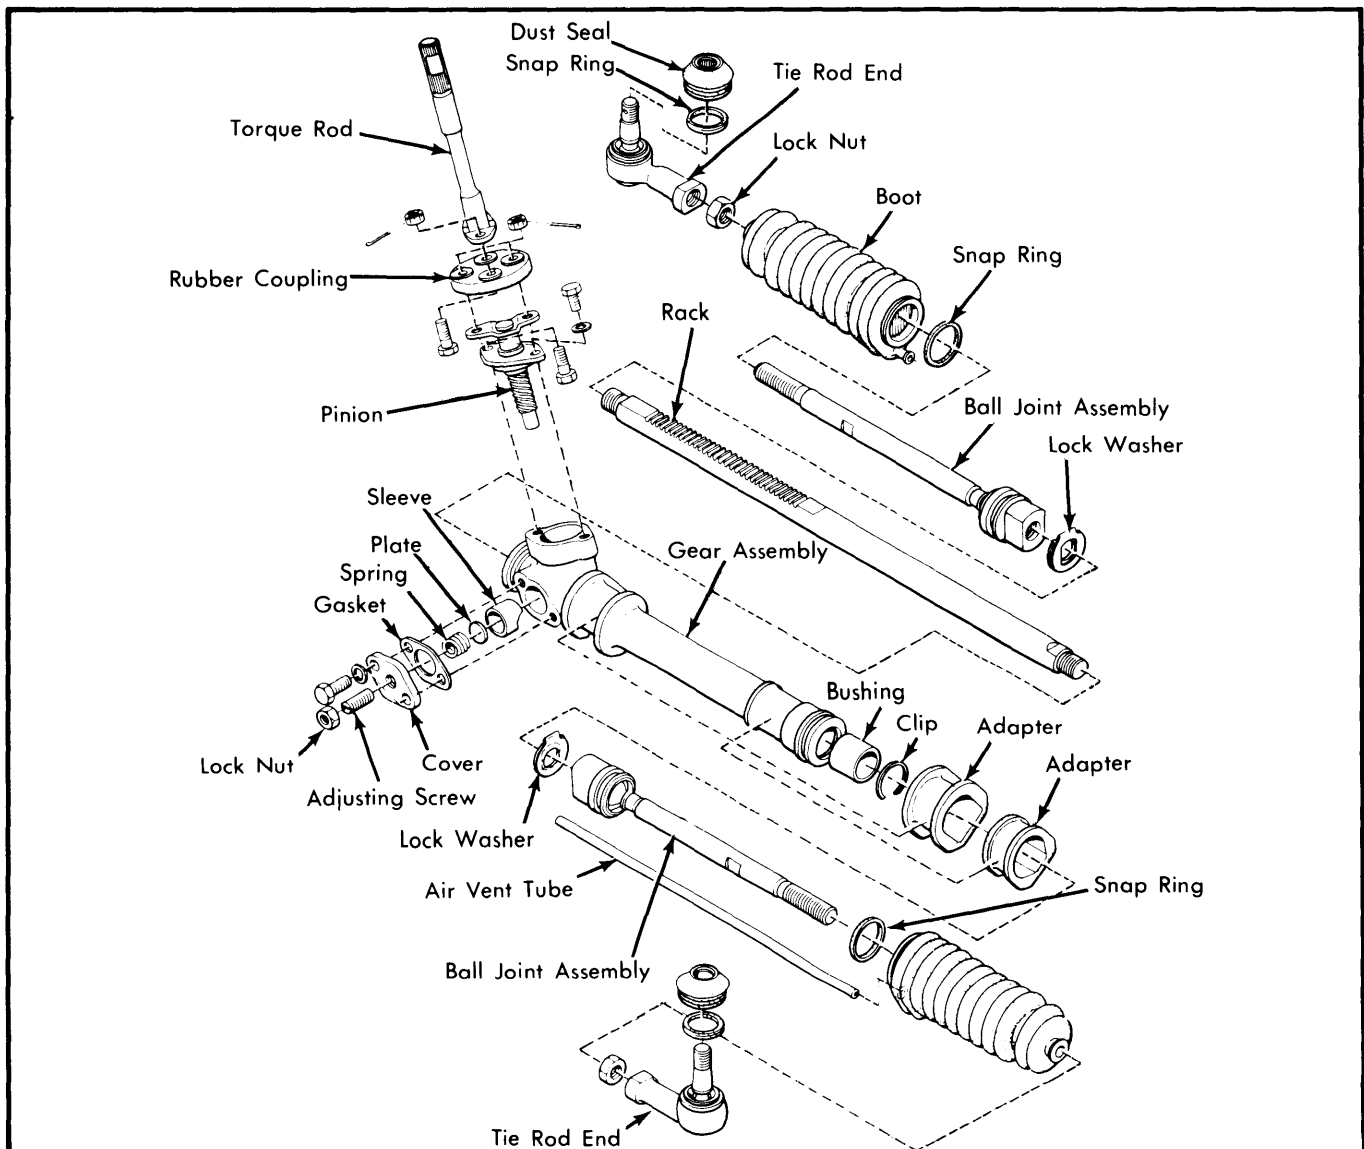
Exploded View of Subaru Rack and Pinion Steering Gear Assembly
